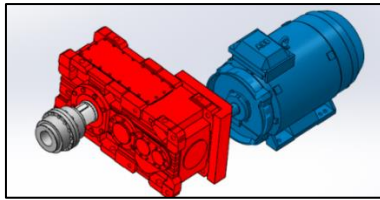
Drive unit: 700 Nm torques producing with 20 rpm
